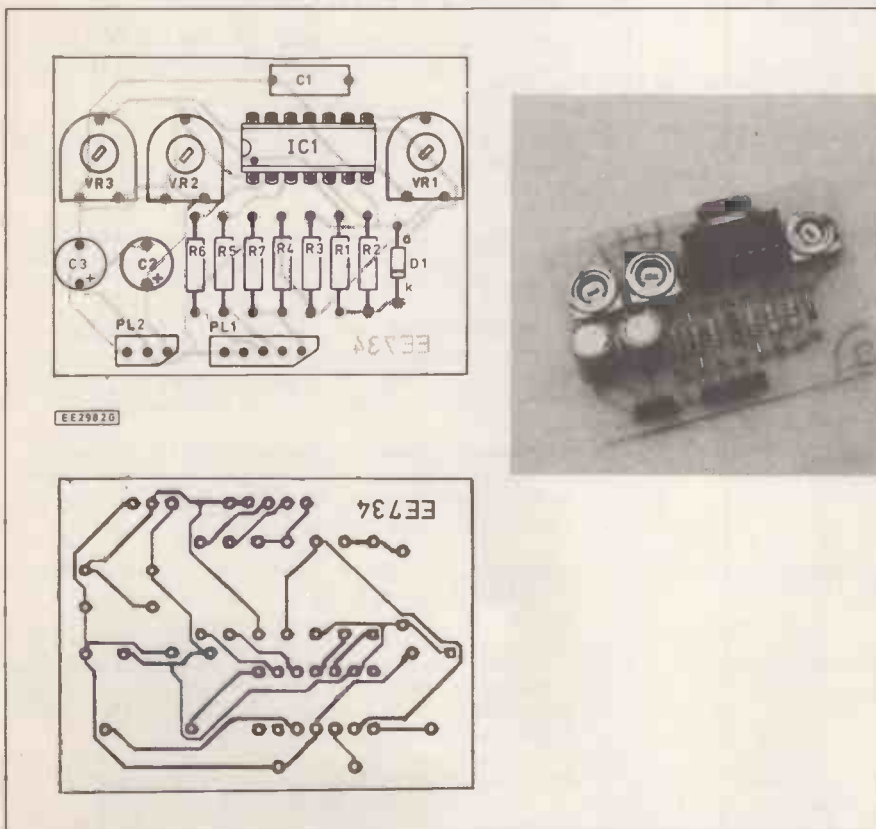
Component layout and full size copper foil master pattern for the 8038 Oscillator Module
